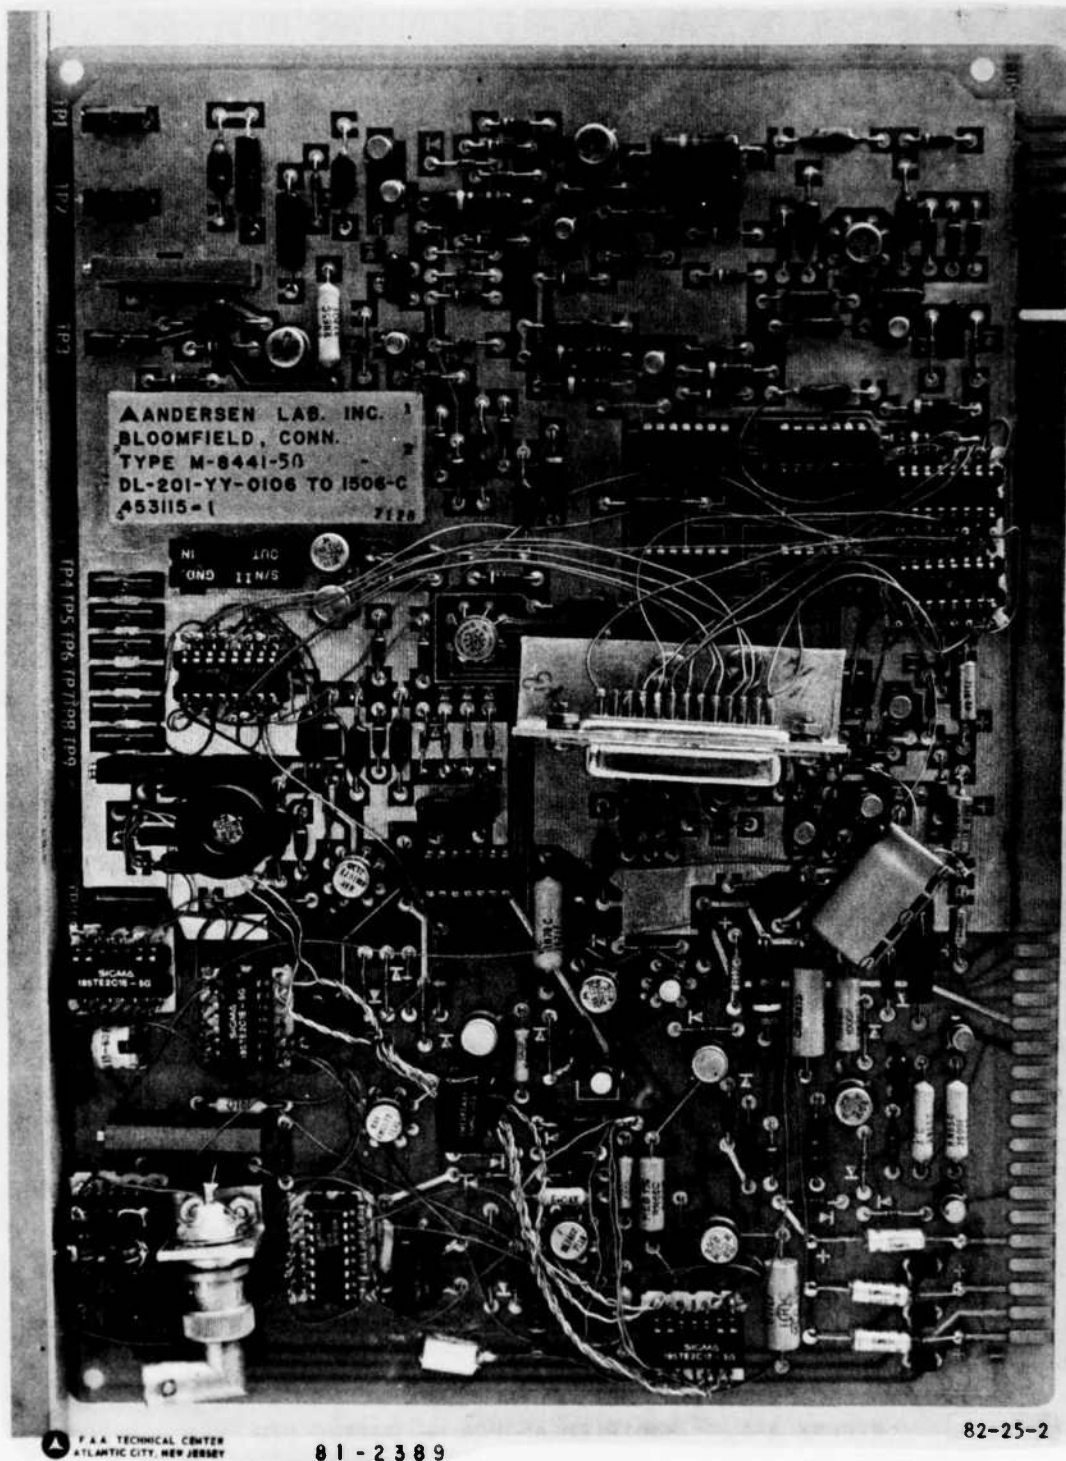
MODIFIED A2 PCB — SWITCH PVD
